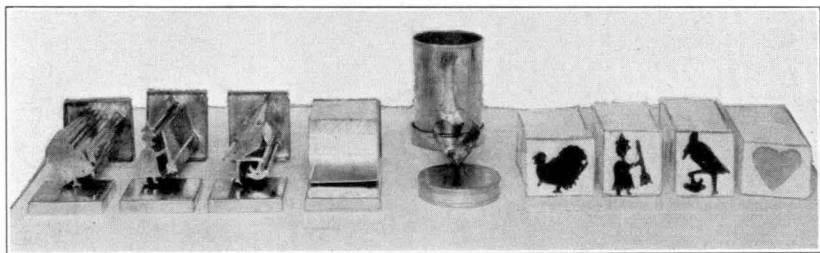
CENTER MOLDS AND CENTER-MOLD BRICKS
